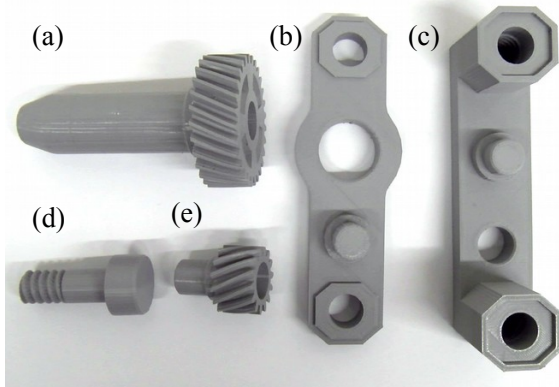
Parts to be collected: (a) Large gear (b) Gearbox top (c) Gearbox bottom (d) Screw (e) Small gear. Note that the large gear (a) is meant to be machined to have threads; the large gear must be inserted into a machine for this process to occur.
